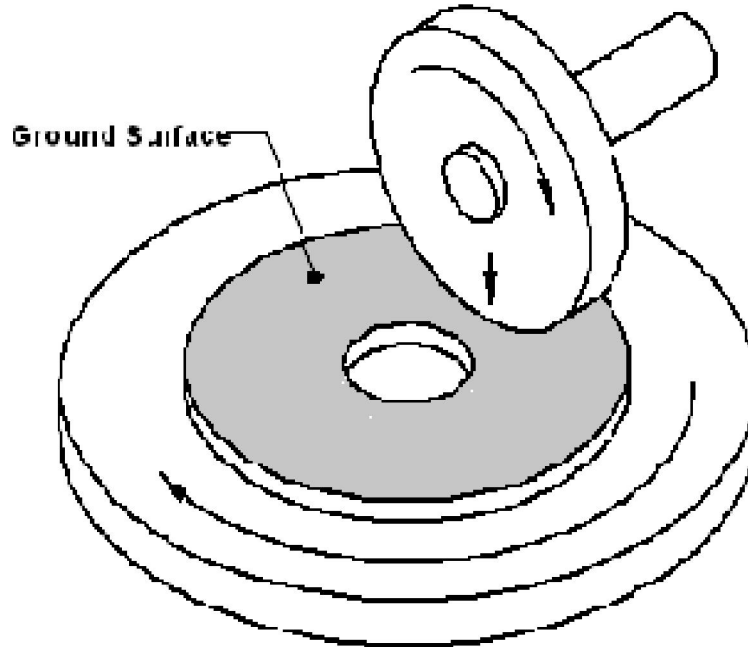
Horizontal-Spindle Rotary Table Surface Grinding
